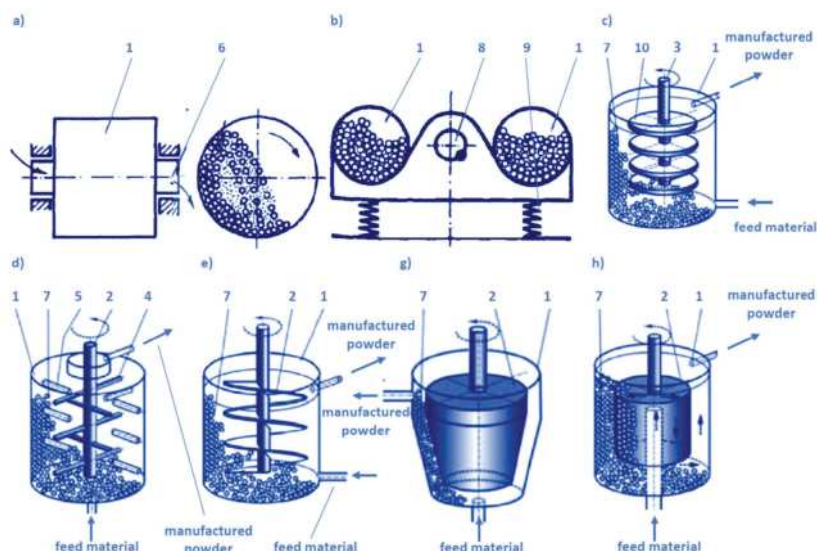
Sample diagrams of several mills used to crush metal powders and alloys; a) ball mill; b) vibrating mill; c) agitator mill with a full rotor; d) agitator mill with a mandrel rotor with fixed mandrels; e) screw rotor mill; f) mill with a cylindrical-conical rotor; g) cup mill rotor; 1 – container with balls, 2 – rotor, 3 – rotor axis, 4 – mandrels, 5 – fixed mandrels, 6 – tenons, 7 – grinders, 8 – drive, 9 – elastic support, 10 – discs
